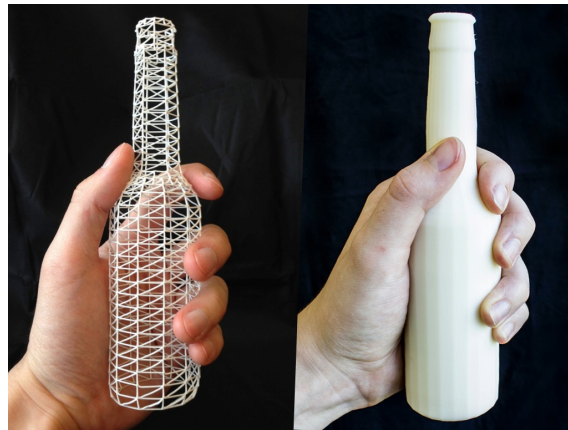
3D prints of a bottle using WirePrint [Mueller, Im, Gurevich, Teibrich, Pfisterer, Guimbretière and Baudisch, 2014]. This wireframe print (left) is 8 times faster than a standard 3D print (right) on the same 3D printer.
